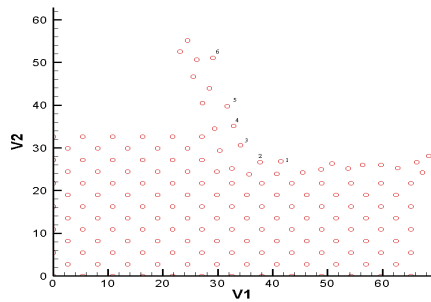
The diagram on the middle cross-section of a silicon workpiece cut by a round-edge cutting tool with rake angle  $15^\circ$ , clearance angle  $10^\circ$  and nose radius  $5\text{ \AA}$  (at the 20,000th step)
